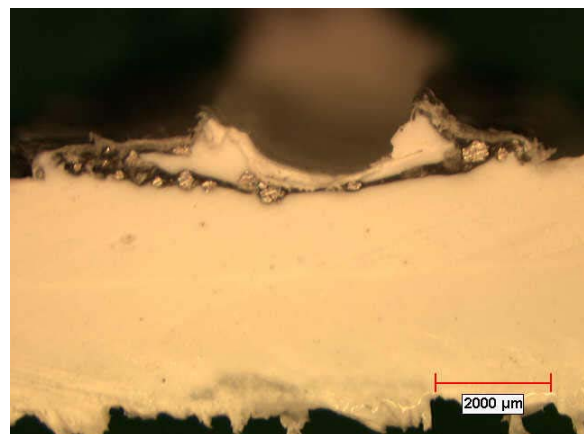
X-cross sectional view of electromagnetic welded sample
